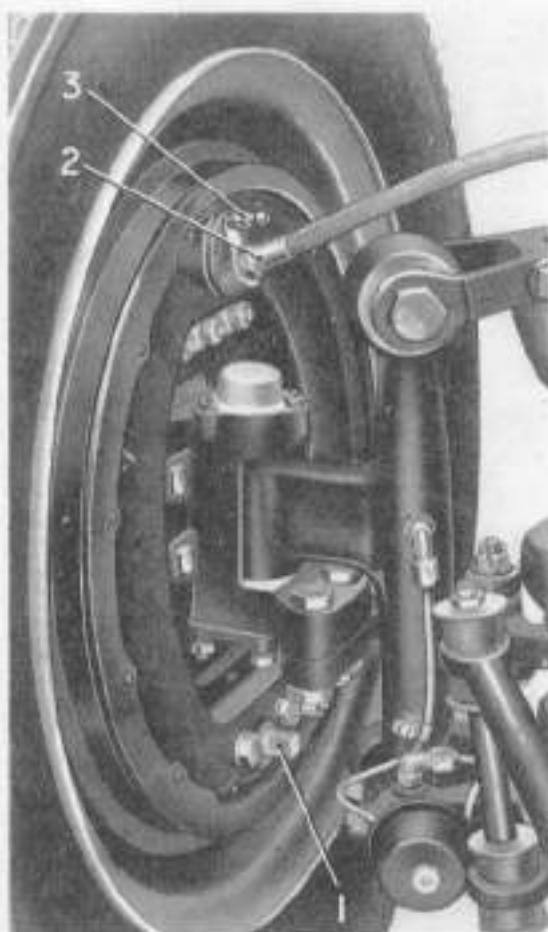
FRONT BRAKE ADJUSTMENT.
